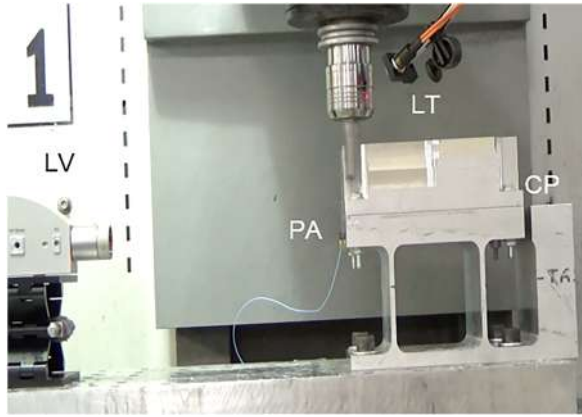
Milling experimental setup with laser vibrometer (LV), piezo-accelerometer (PA), laser tachometer (LT), and capacitance probe (CP)
